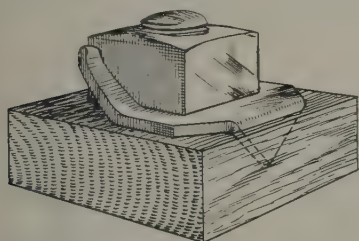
Bartley Diamond Tang Fastener for Application to Wood. American Nut &amp; Bolt Fastener Company.
